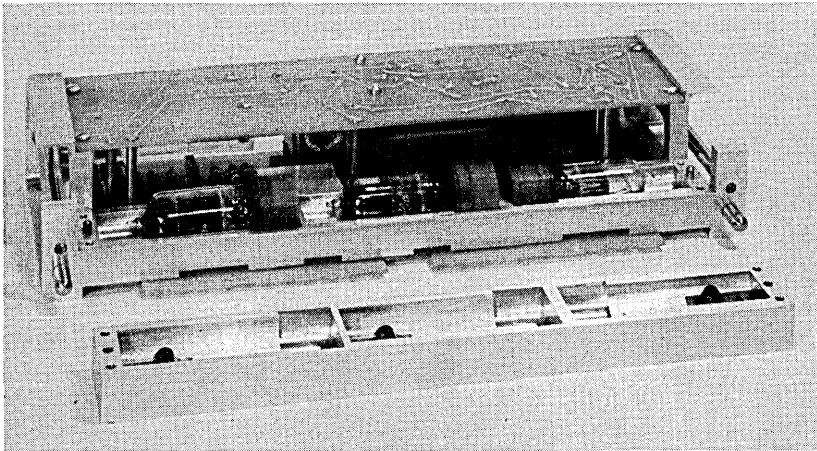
Circuit boards mounted on frame which is also used as heat conductor to a sink for conductive-type cooling
